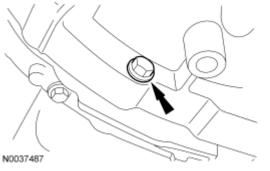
Locating Bellhousing-To-Oil Pan Bolt Courtesy of FORD MOTOR CO.
